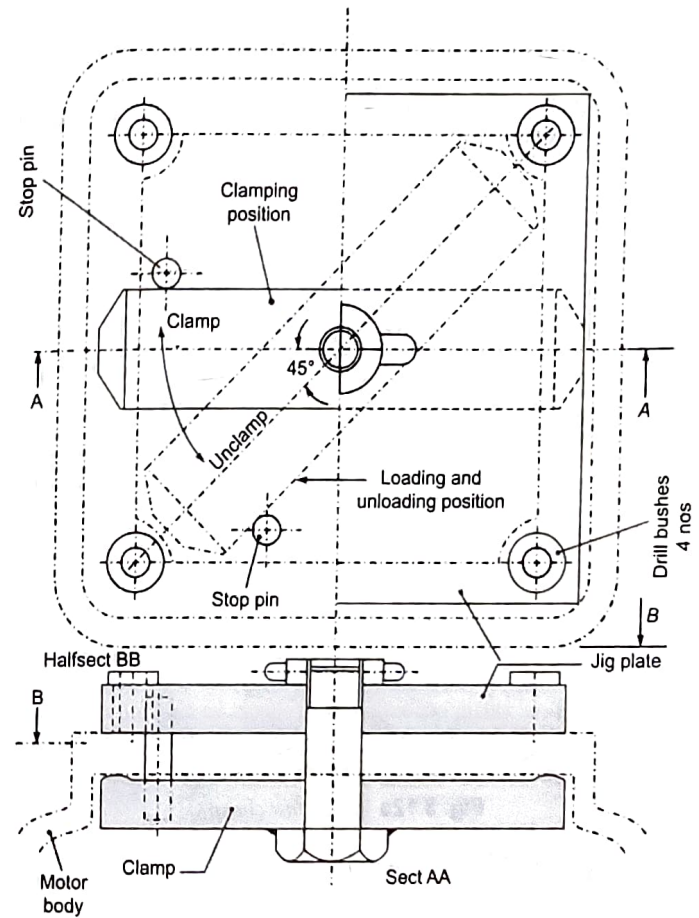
Special swing clamp for drill jig for terminal box holes in electrical motor body
